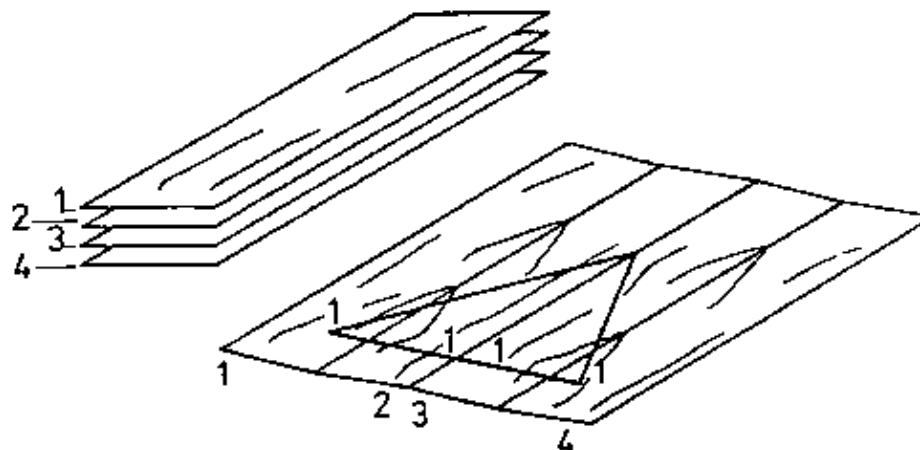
Arrangement of a wide veneer face with separate veneer sheets (1, 2, 3, 4)
